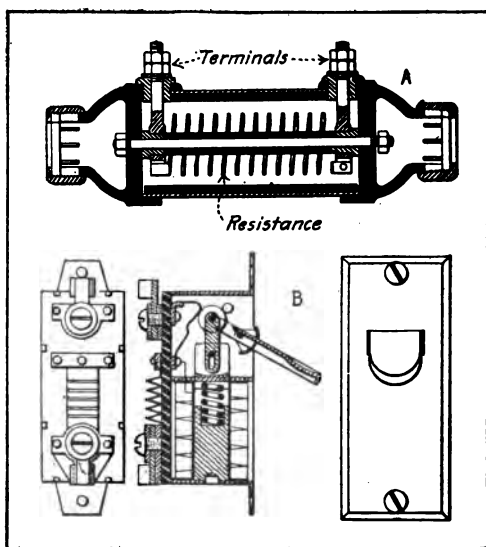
Sectional View at A Shows Construction of Air Warmer to Facilitate Carburetion in Cold Weather. Section of a Protective Circuit Breaker Outlined at B.
